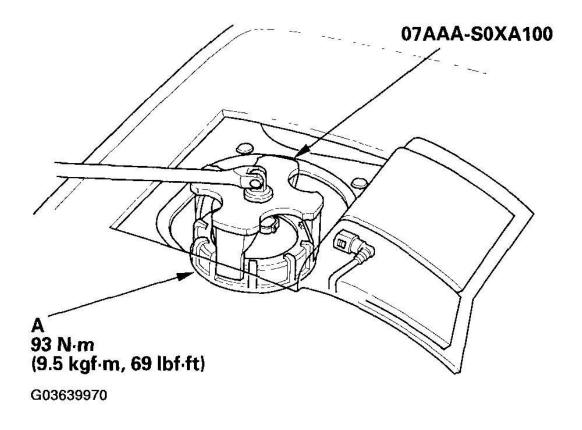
Loosening Fuel Tank Unit Locknut Using Special Tool Courtesy of AMERICAN HONDA MOTOR CO., INC.
